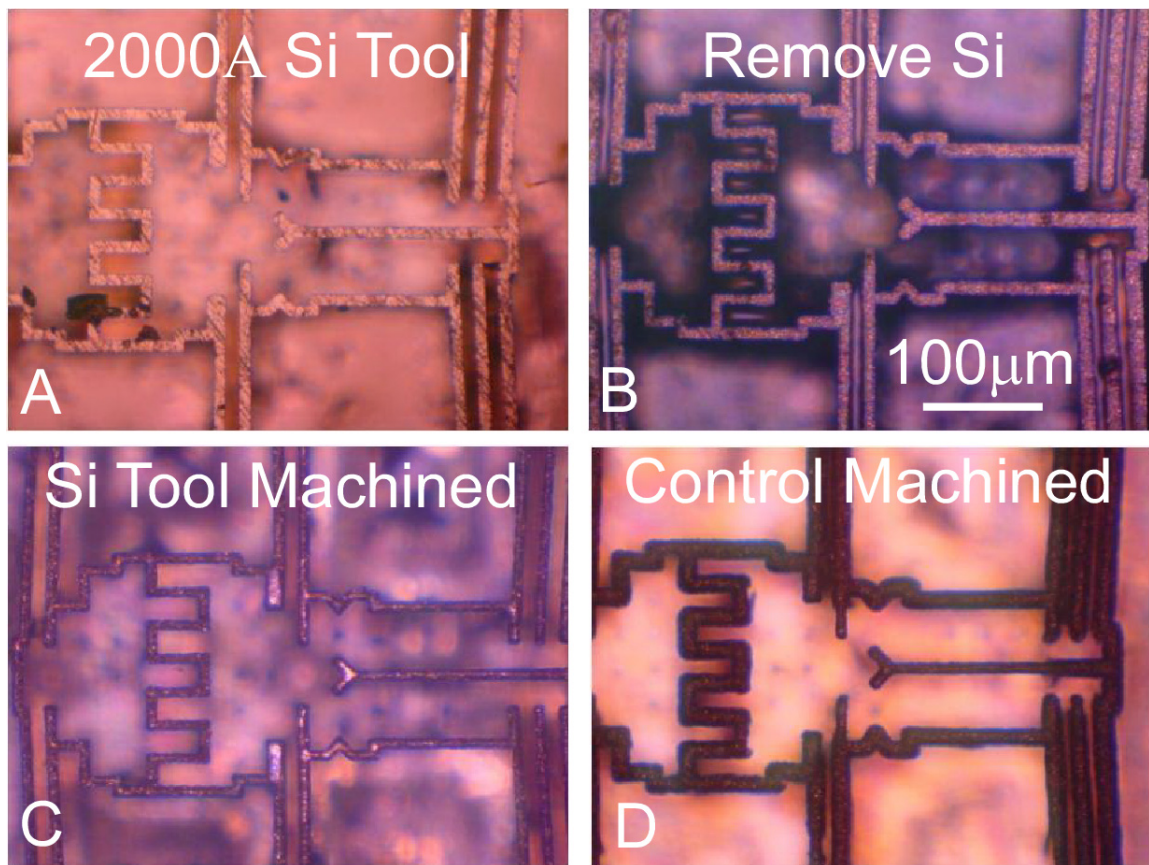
Optical photos of the test pattern. First 2000Å of Si are deposited on the copper tool (A). Next (B) the silicon is removed from just the top surface by reverse polarity EDM. Then machined in C. The uncoated tool in D has much wider after machining.
